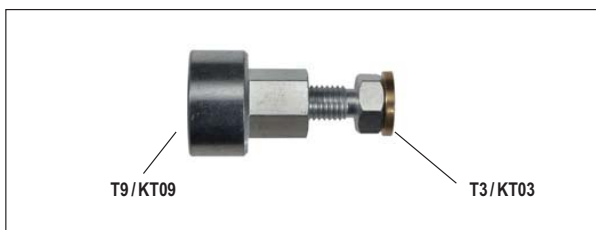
ON-VEHICLE INNER SEAL TOOL (L1)
